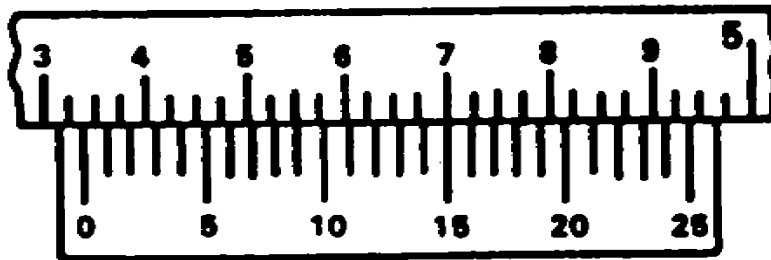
ENGLISH VERNIER CALIPER SCALE
